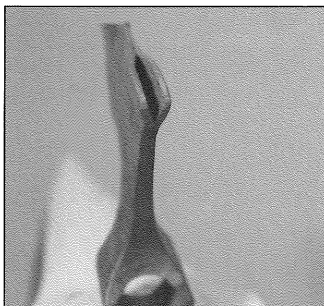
Chisel cut to a depth of $\frac{1}{2}$ " deep. Make sure the cut is a constant depth across the whole blade
